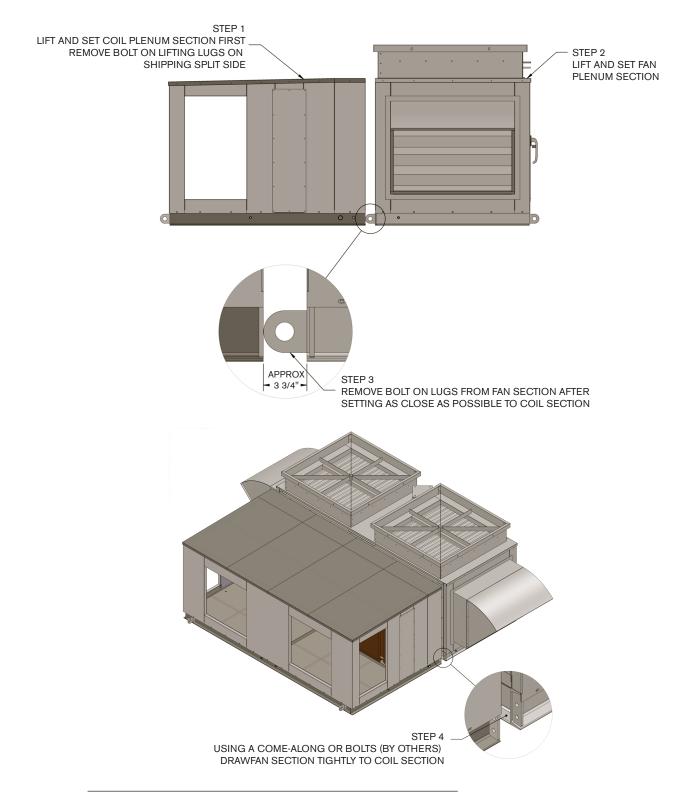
Heat Recovery Multiple Plenum Section Assembly
